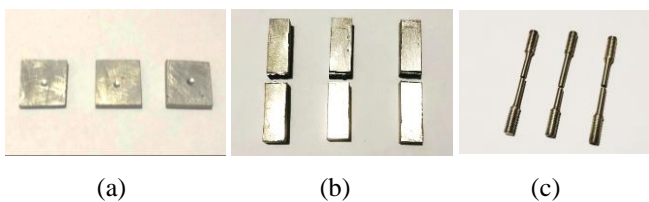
Final specimens after testing for a) Hardness test, b) Impact test, and c) Tensile test.
